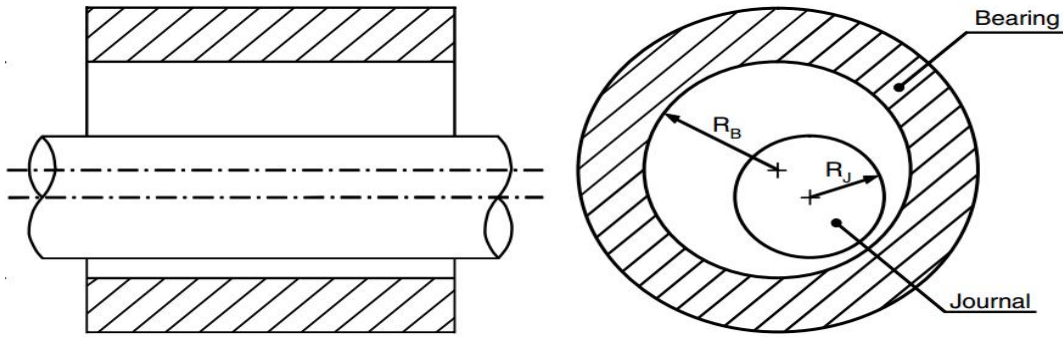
Revolute joint with clearance. (Clearance is exaggerated for illustration)
